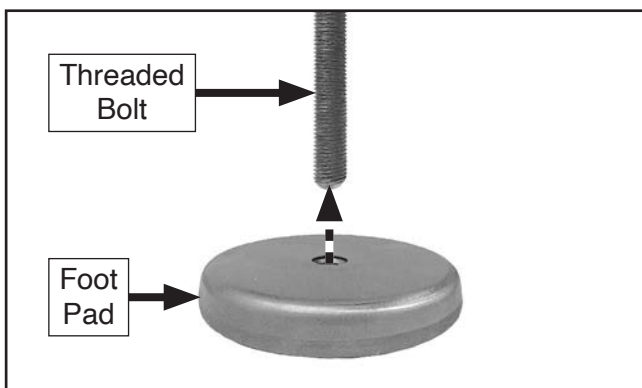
Installing foot pad on threaded bolt (mounting leg removed for clarity).
